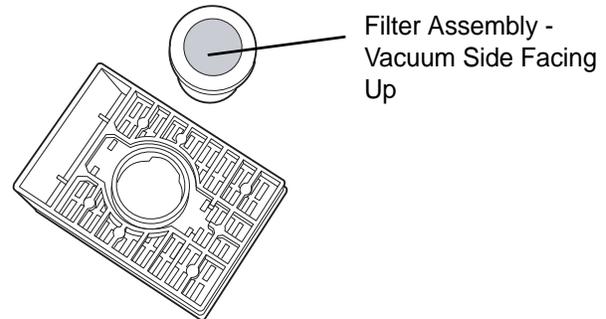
Cassette and Filter Assembly - Vacuum Side
